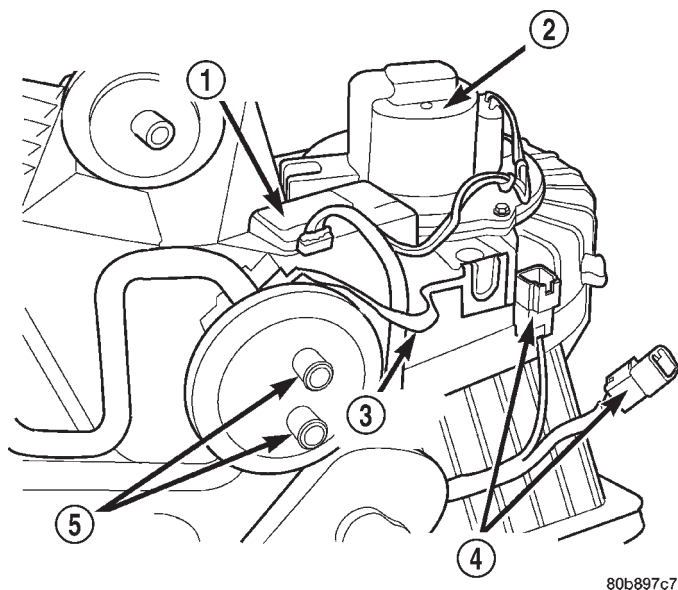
BLOWER MOTOR (HOUSING REMOVED FROM VEHICLE)
